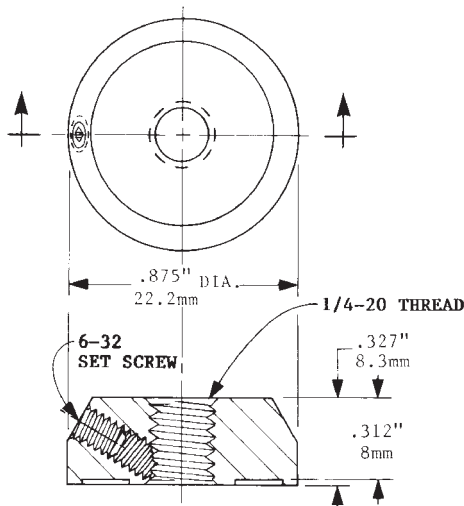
MUSHROOM RECEIVER DIMENSIONS
